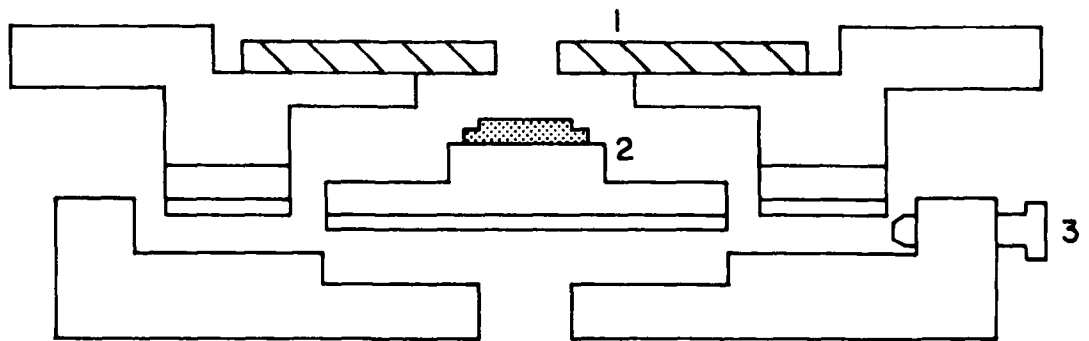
(b). Exploded view of circular ion milling sample holder showing (1) sapphire mask, (2) GaAs sample and platform, and (3) one of three positioning screws.
